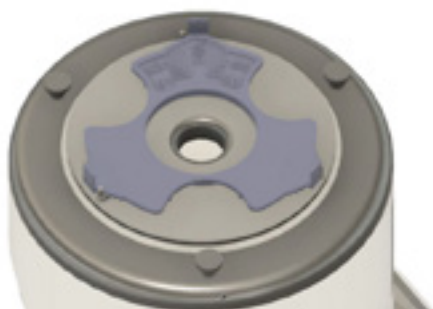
Setting Tool placement for plate centralisation (odd diameters shown)
